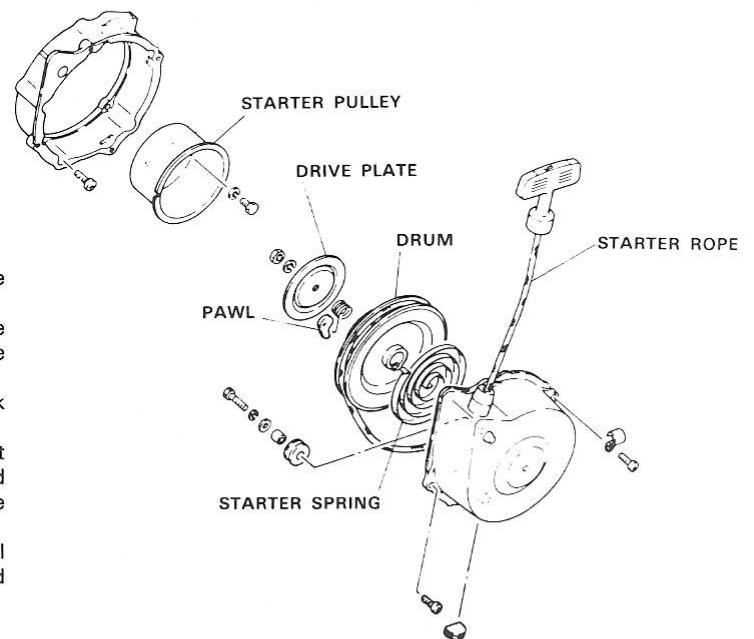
A.25 YT 125/175 recoil starter components — exploded view (Sec 17)
